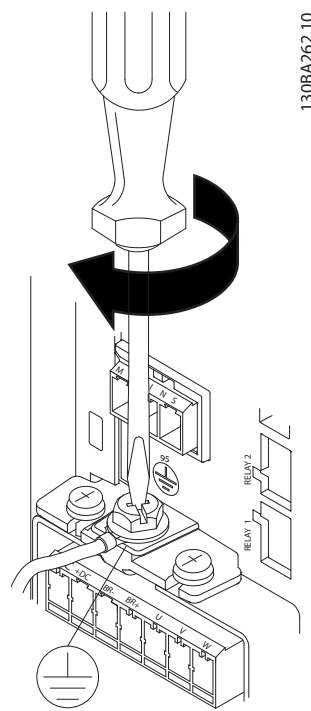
When mounting cables, first mount and tighten ground cable.
